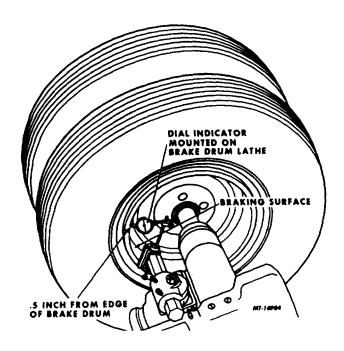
Checking Drum Runout on Brake Drum Lathe
